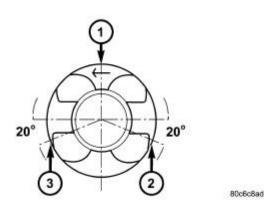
Piston Rings - Removal/Installation Courtesy of CHRYSLER GROUP, LLC
